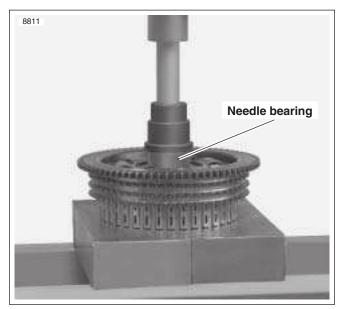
Installing Clutch Shell Needle Bearing Clutch Shell Bearing Remover/Installer B-45926
